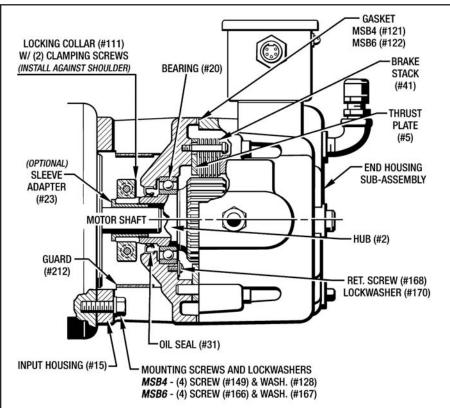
Mounting MSB4 and MSB6 Back On The Motor
